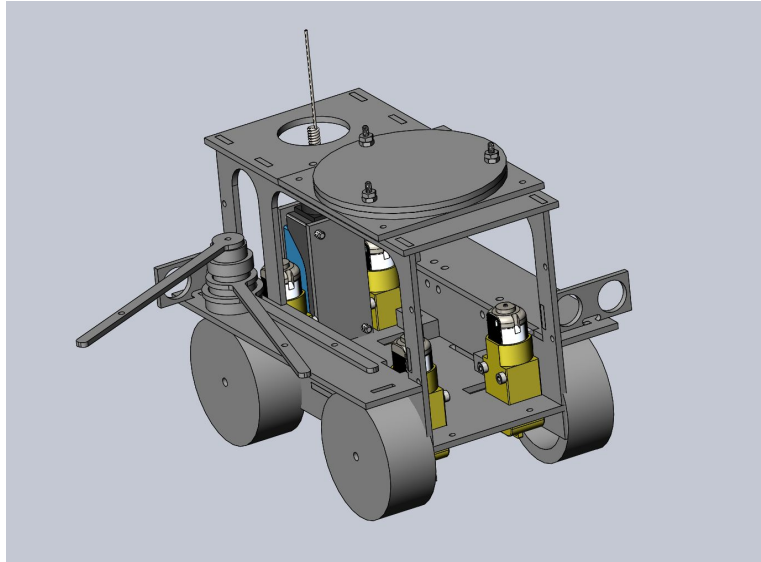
Final CAD of robot: isometric view highlighting unique defense mechanism and ultrasonic sensor mounts.
